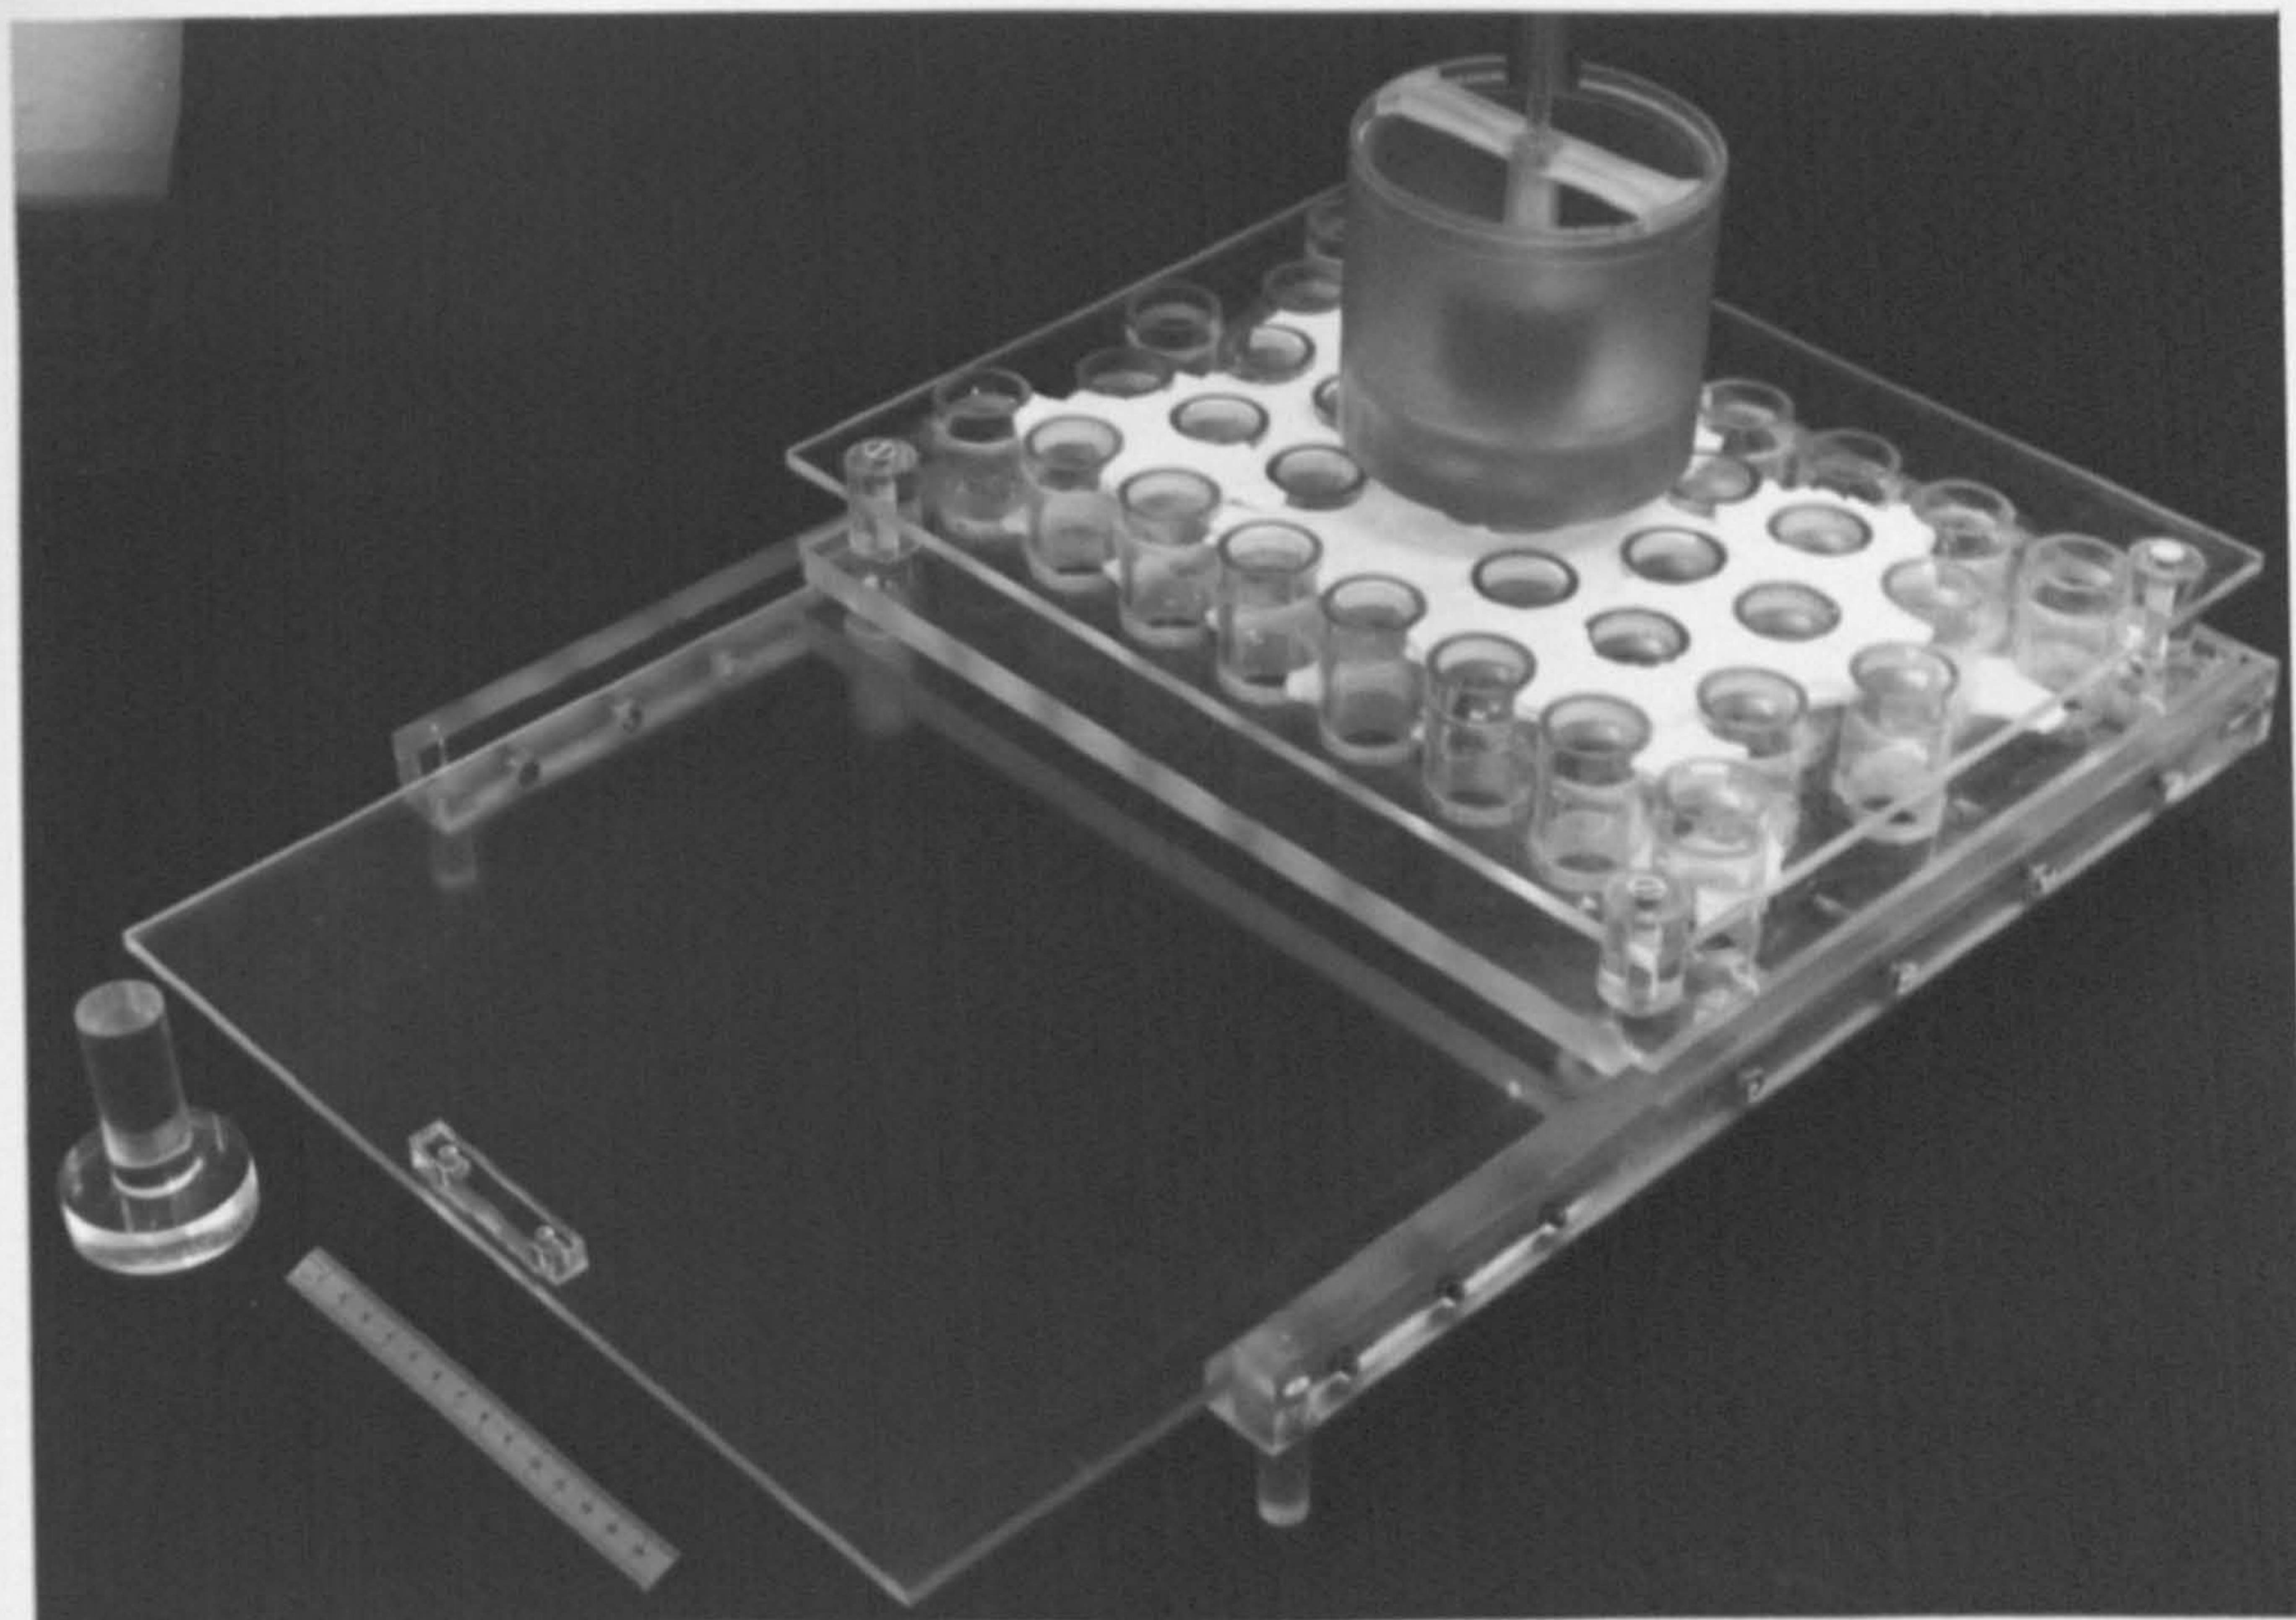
SOLID CYLINDER MOULD ASSEMBLY
